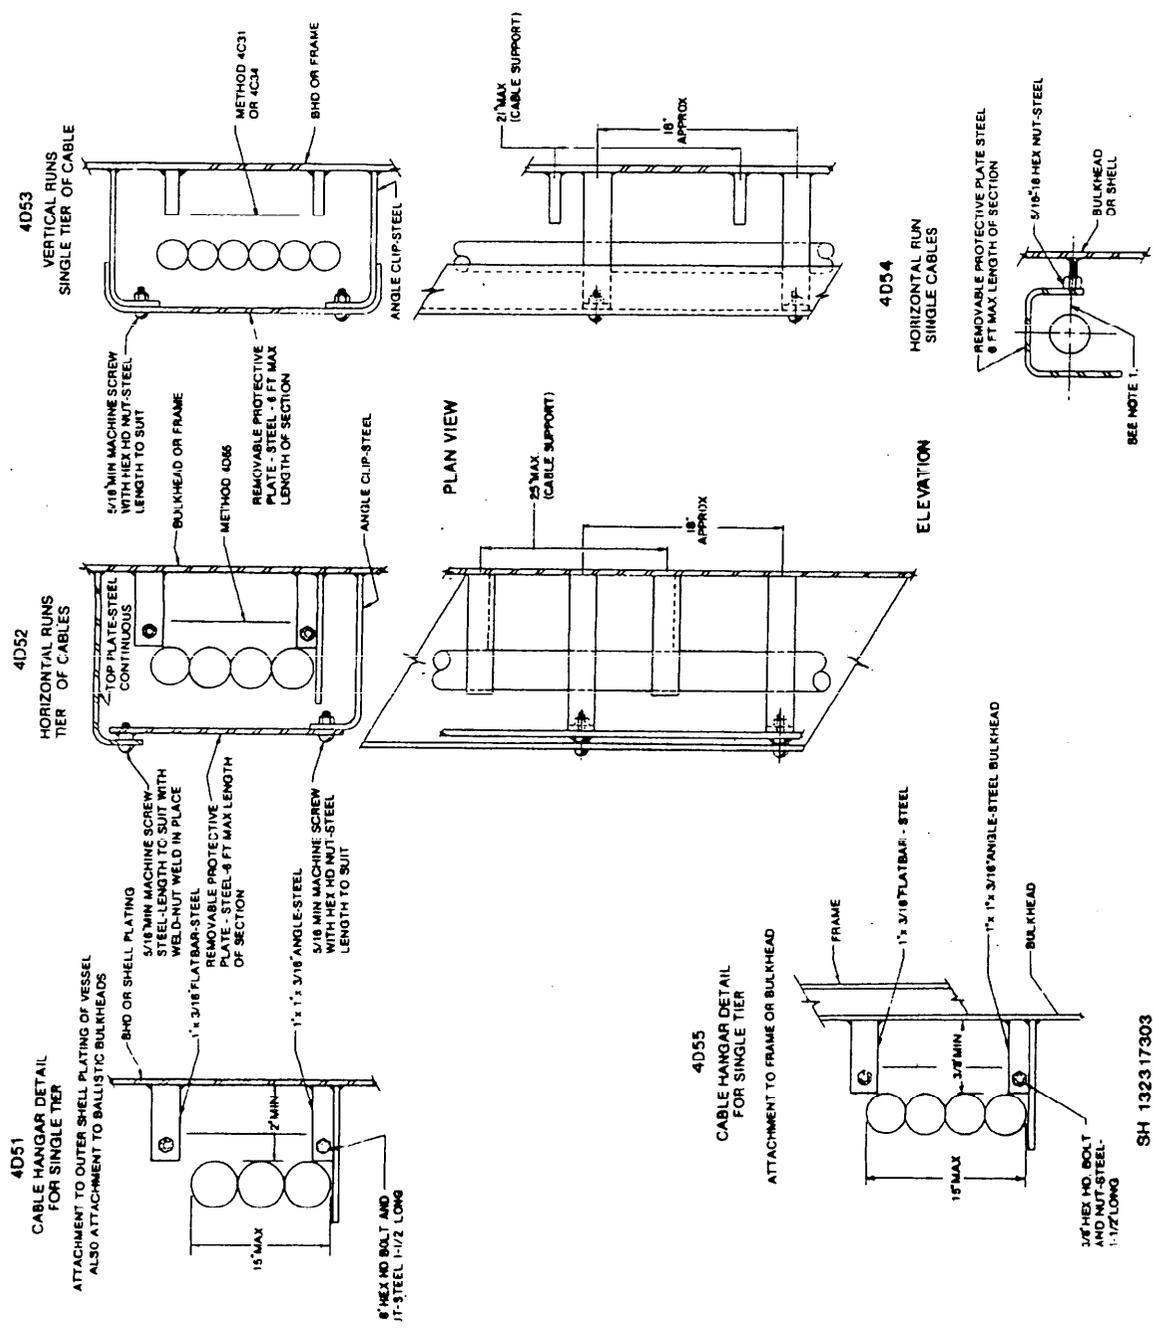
D5. Protection of degaussing cables from mechanical injury.
